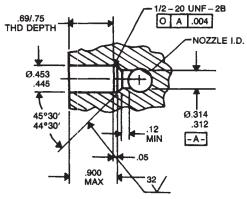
Mounting Hole dimensions for nozzle pressure transducer PT465XL
